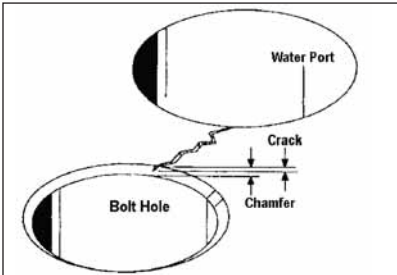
Cracked Cat 3208 heads can be used in service as long as the cracks don't extend below the depth of the bolt hole chamfer.
